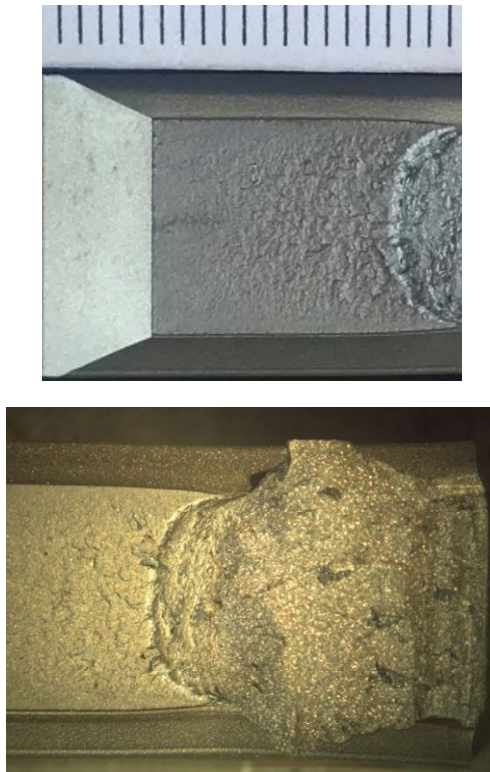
shows the fractography images of the C(T) testing post fatigue crack growth testing. Three regions have been identified on the fracture surface during postmortem analysis. The smooth portion of the fracture surface shows the region of pre-fatigue cracking. This was followed by ductile crack extension before the specimen was broken via fast fracture. The uneven fracture surface may be due to the onset of tertiary fatigue crack growth, hence such features may arise as a result of fast crack growth with some level of plasticity present. As there is uniformity in the fatigue crack region, this shows good alignment in the test set up. Measurements from the fractographical assessment were taken and compared to those from the unloading compliance for comparison purposes.
